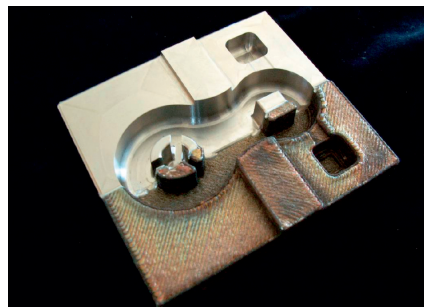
Insert fabricated by near-net-shaped welding (90 x 100 mm)
